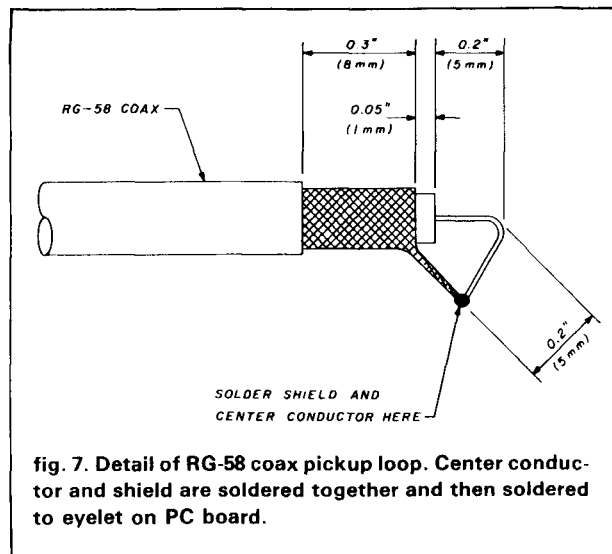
Detail of RG-58 coax pickup loop. Center conductor and shield are soldered together and then soldered to eyelet on PC board.
